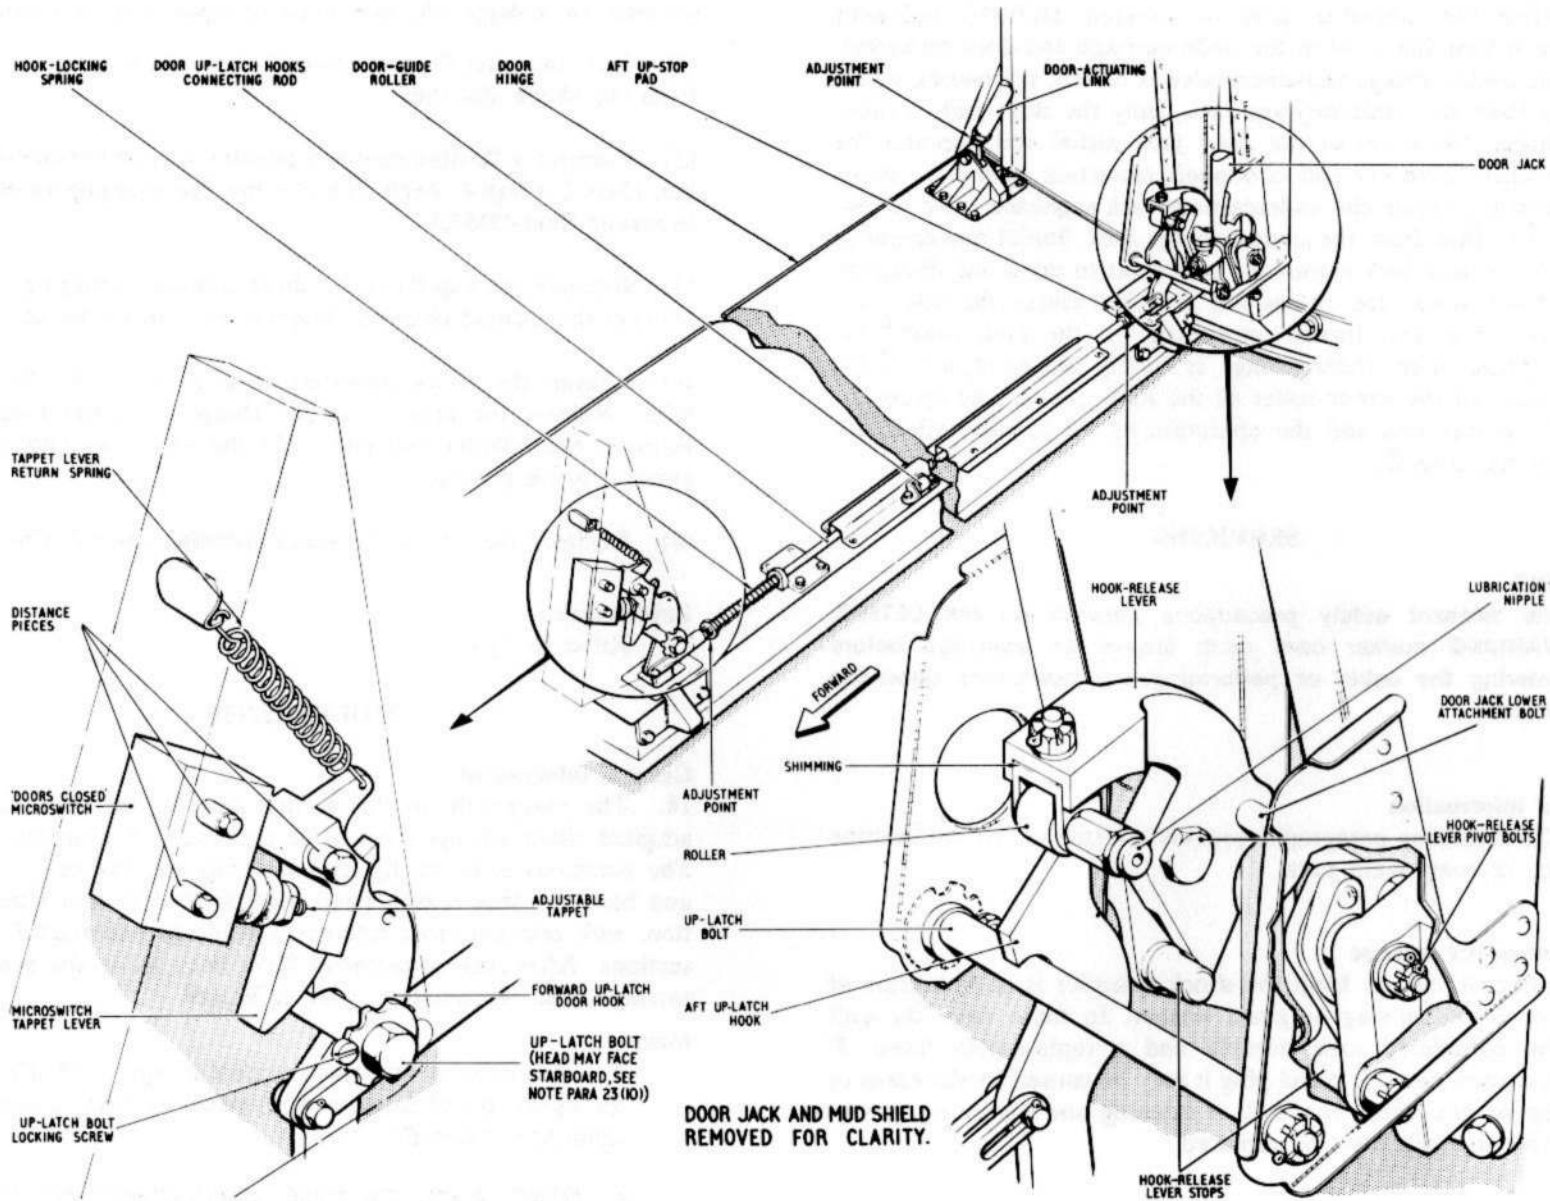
STARBOARD DOOR LOCKING MECHANISM
